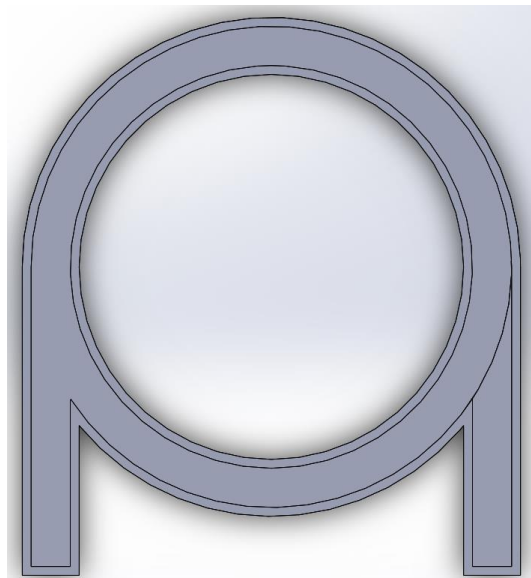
3D model of the PCM storage tank drawn by using SolidWorks
